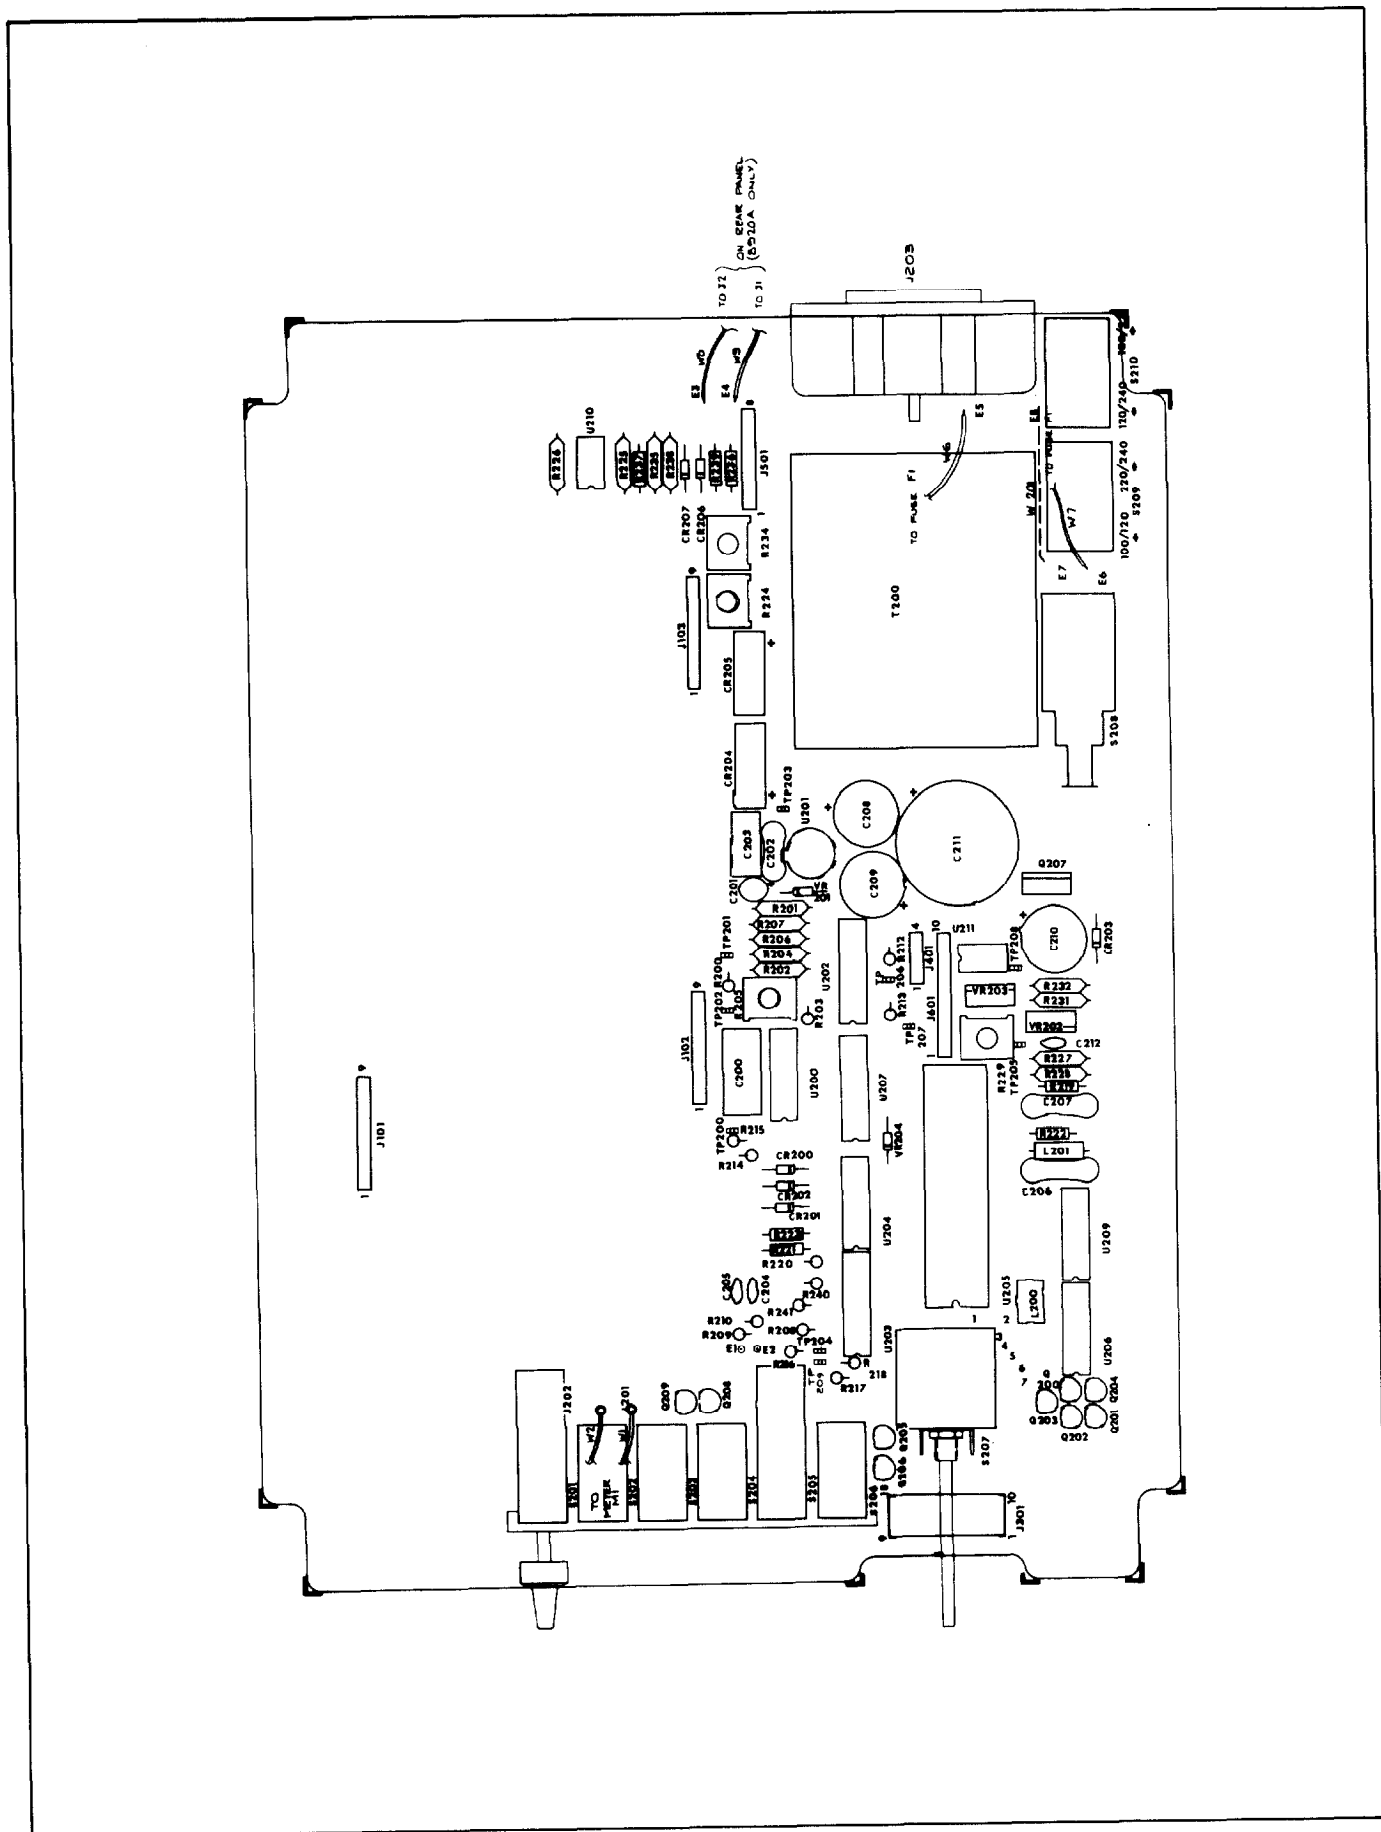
A1 8920A Main PCB Assembly (cont)
